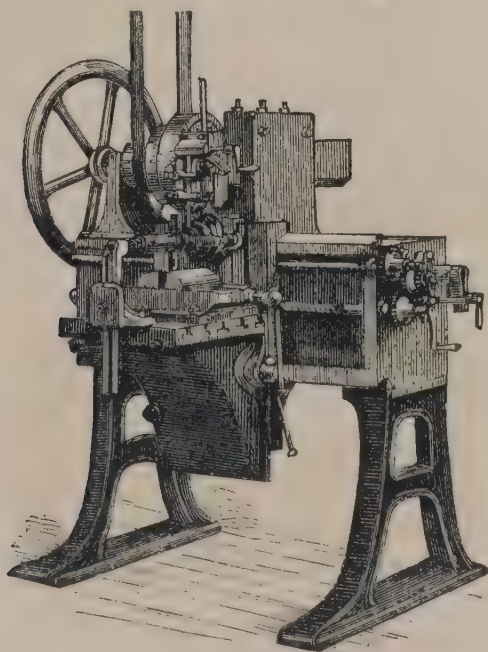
MUIR'S SELF-ACTING UNIVERSAL SHAPING MACHINE.
